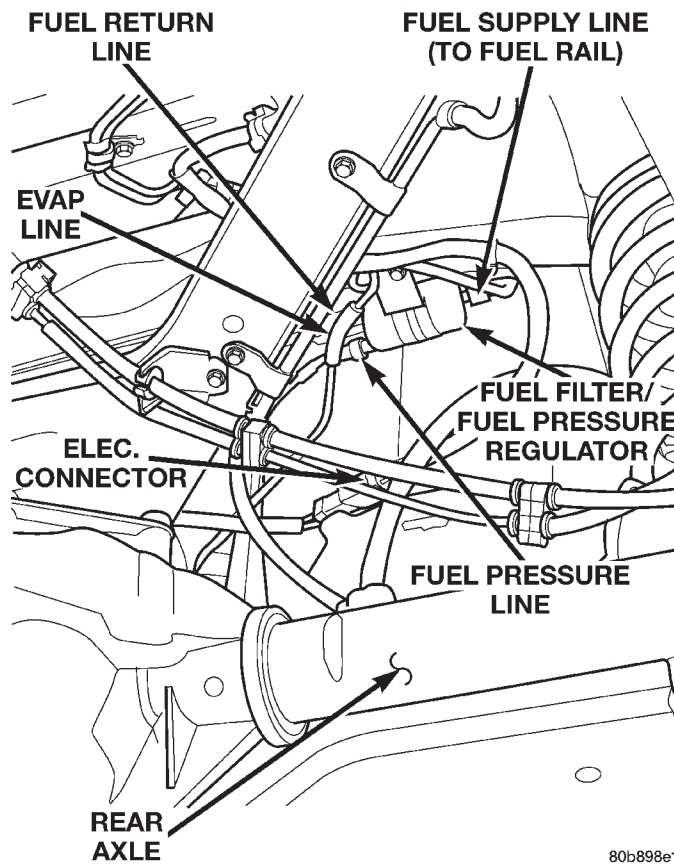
Fuel Filter/Fuel Pressure Regulator
